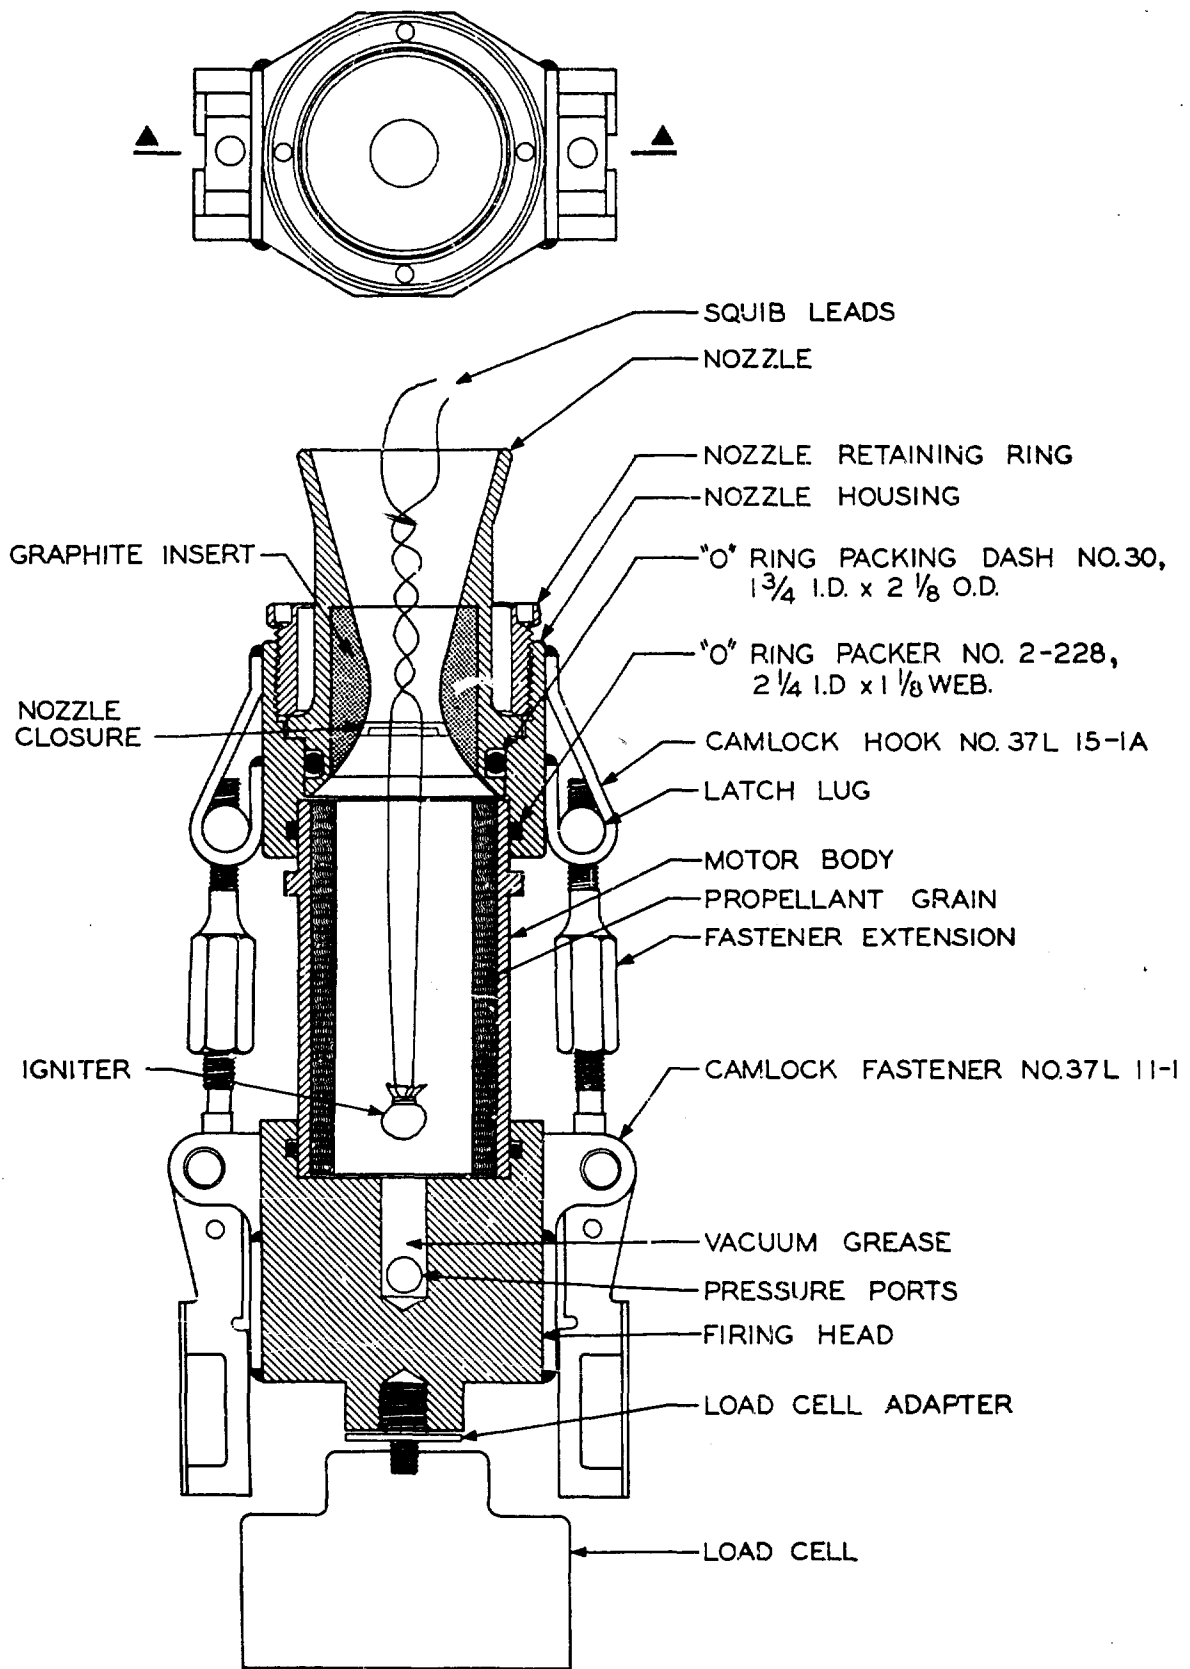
Clamp-type 2C1.5-4 motor firing assembly.
